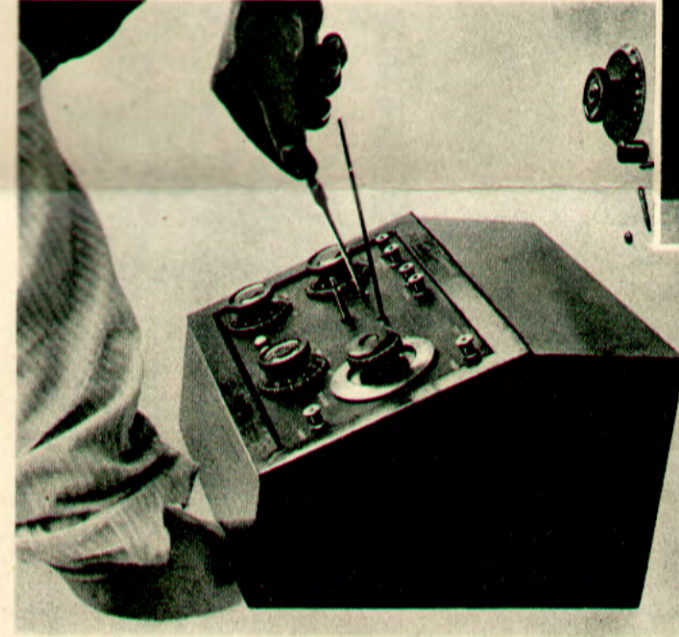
A rod inserted through tapped hole in condenser and panel brings them into register
